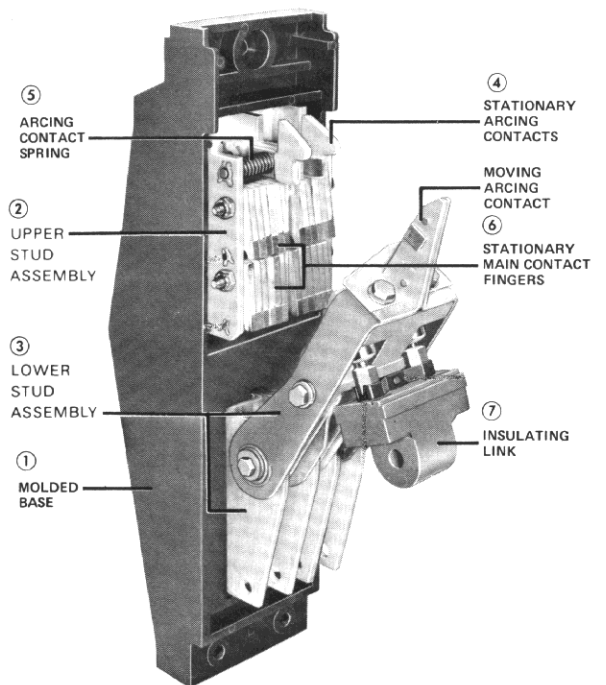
Type DS-632 Pole Unit Assembly—Front View
